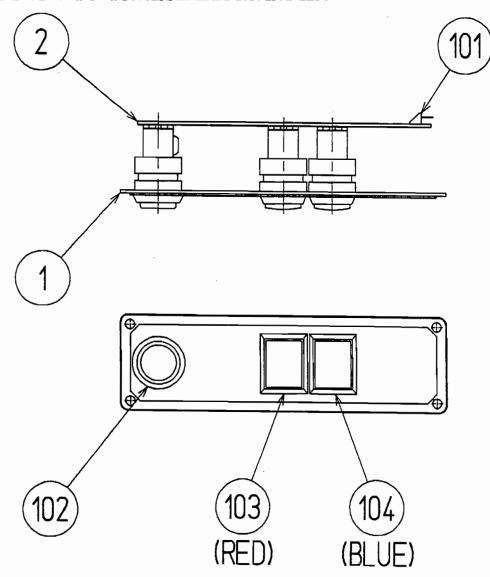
START AND VIEW BUTTON ASSEMBLY
